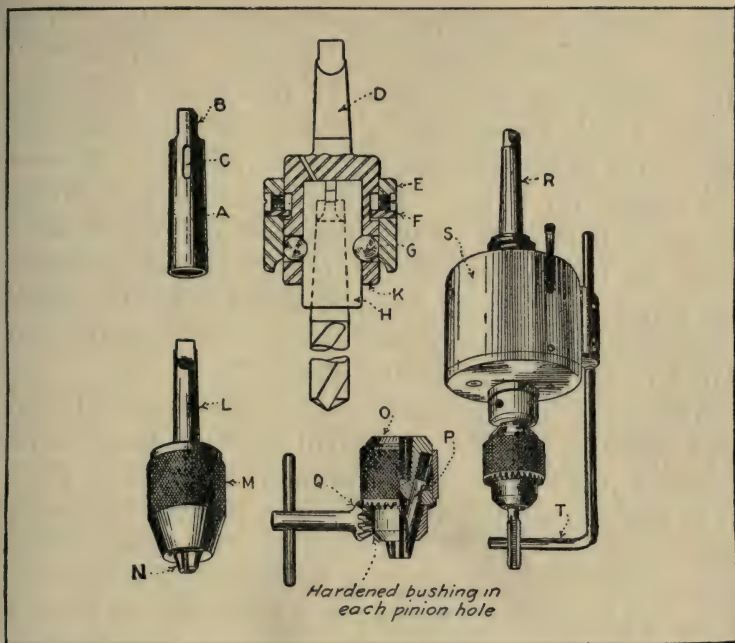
DRILL CHUCKS, SOCKETS, AND TAPPING ATTACHMENTS
